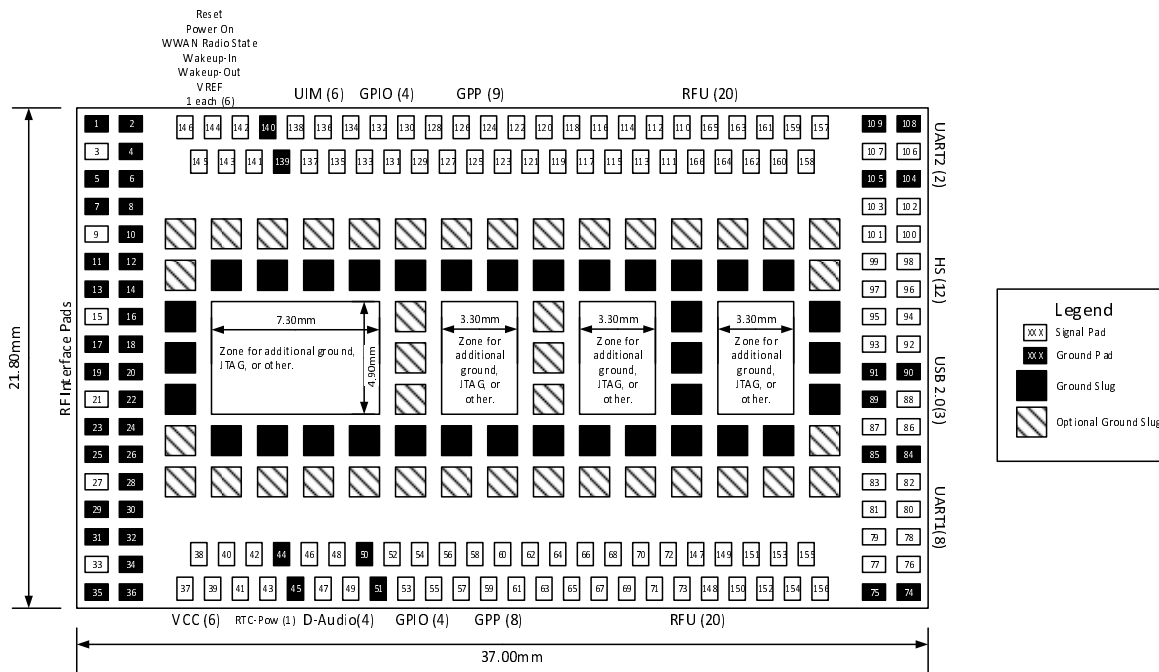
SMT3722 black and white physical form factor (807 mm<sup>2</sup>), dimensions, pad numbering and placement
